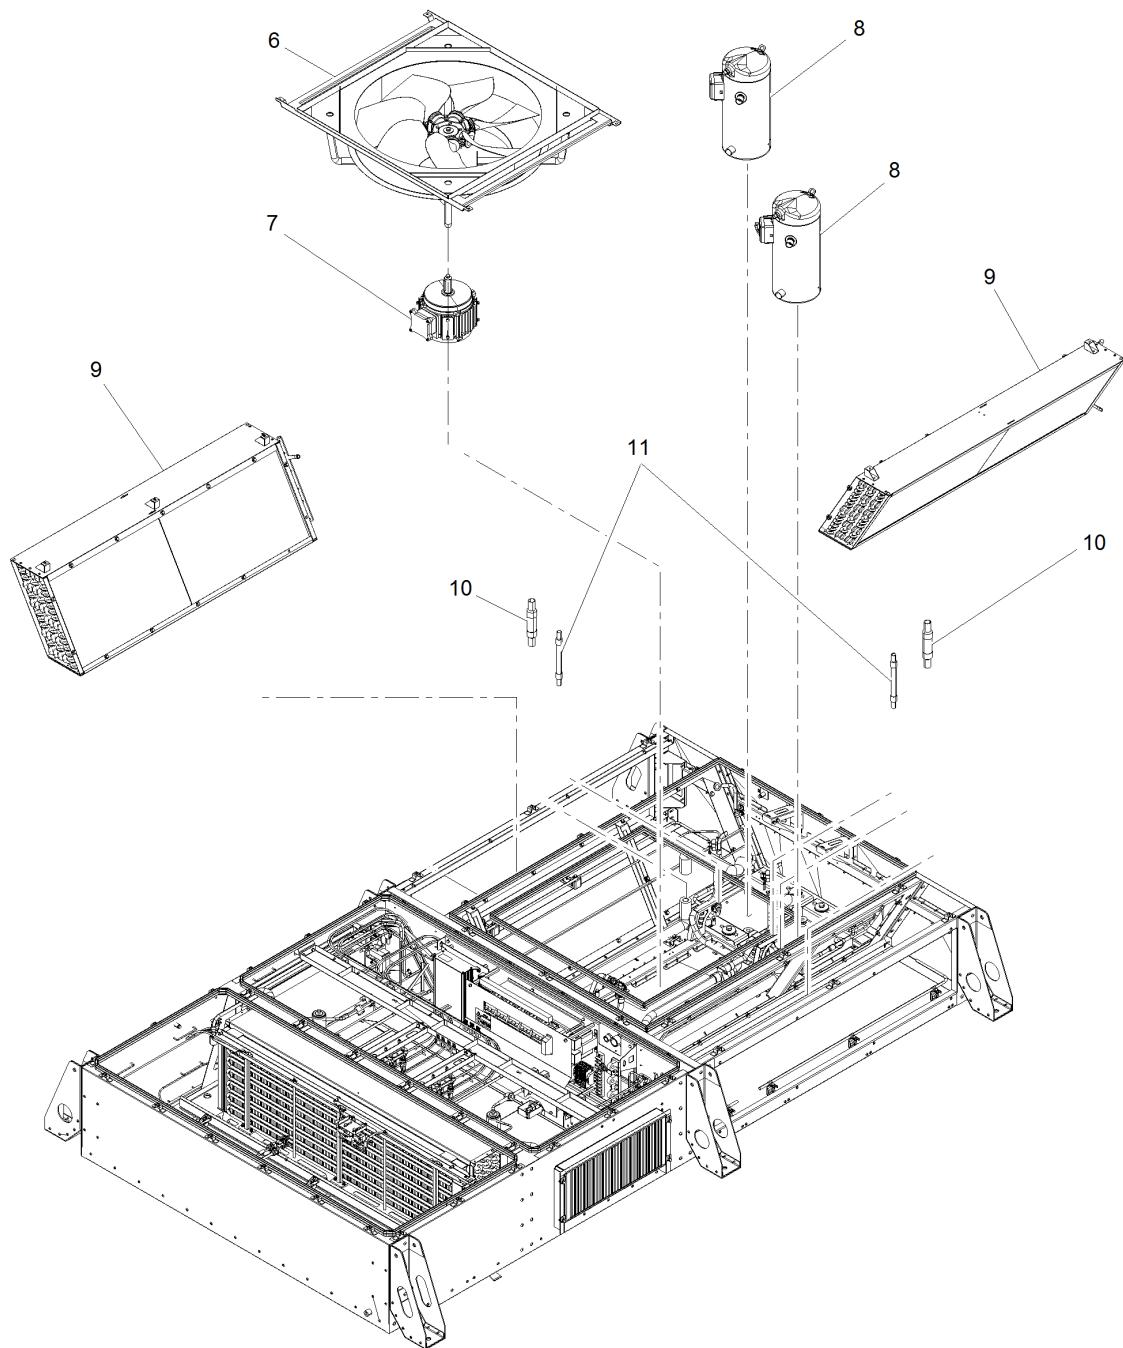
Clean and Inspect HVAC Equipment 30,000 Miles
